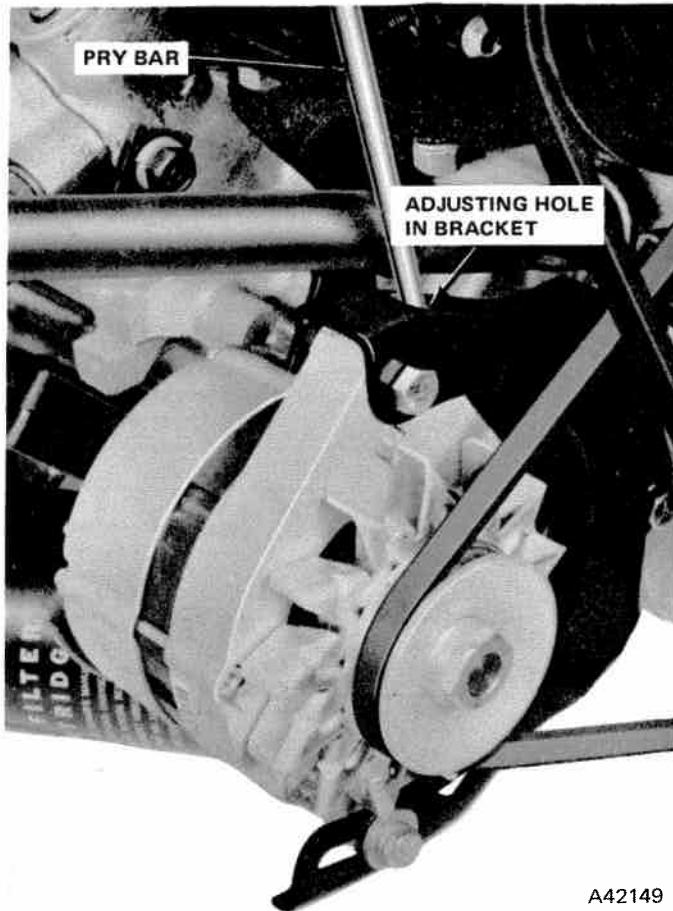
Adjusting Belt Tension - Six-Cylinder Engine
